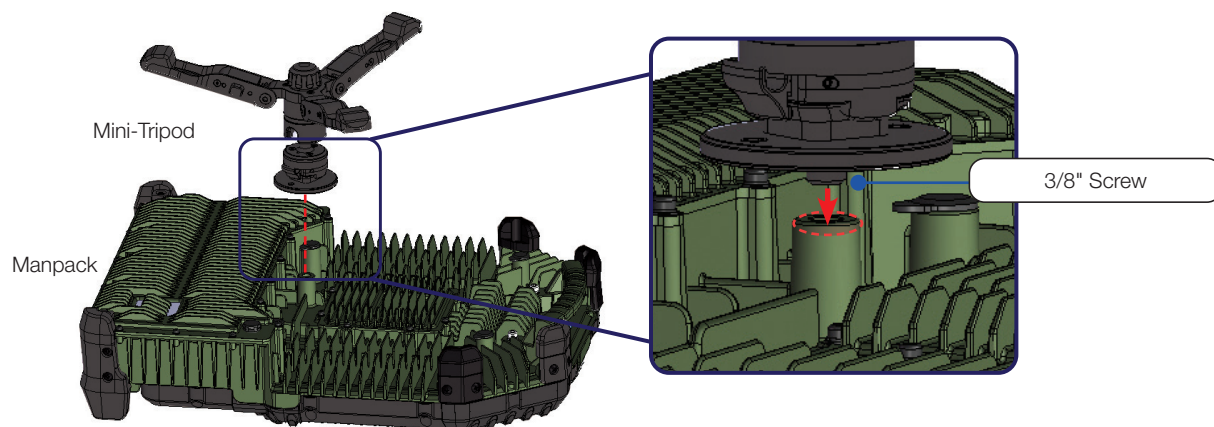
Inserting the 3/8" Screw of the Mini-Tripod
